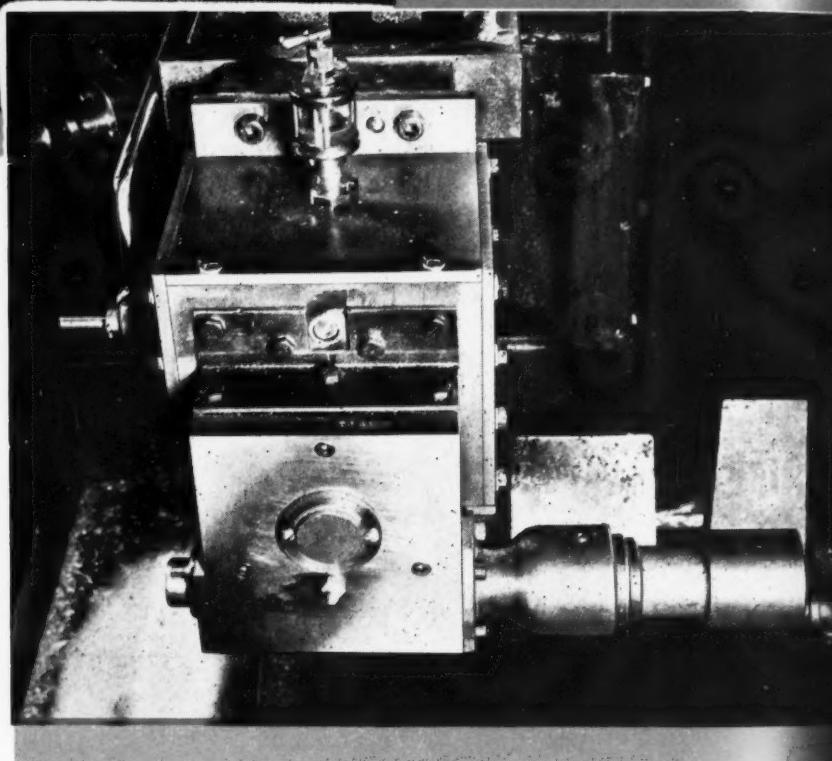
An Air Motor Mounted at One End of the Table on the Machine Shown in Fig. 5 Drives the Lead-screw to Feed the Table
